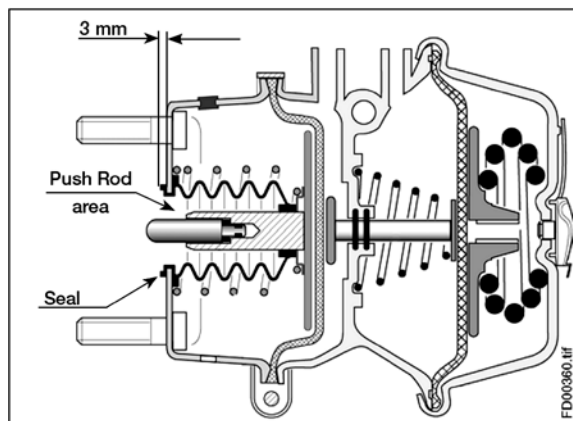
DRIVE AXLE BRAKE AIR CHAMBER 12126
